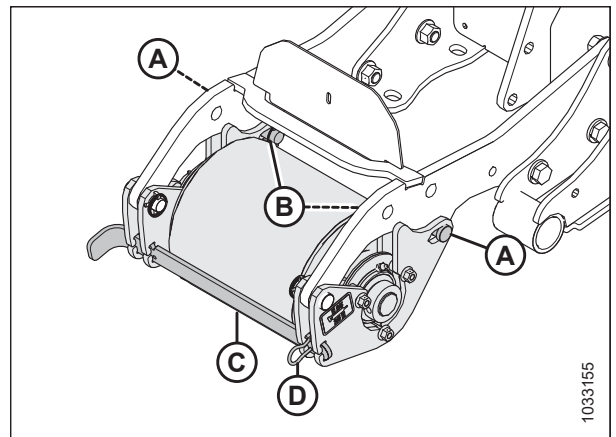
Gauge Roller Secured in Lowest Working Position
